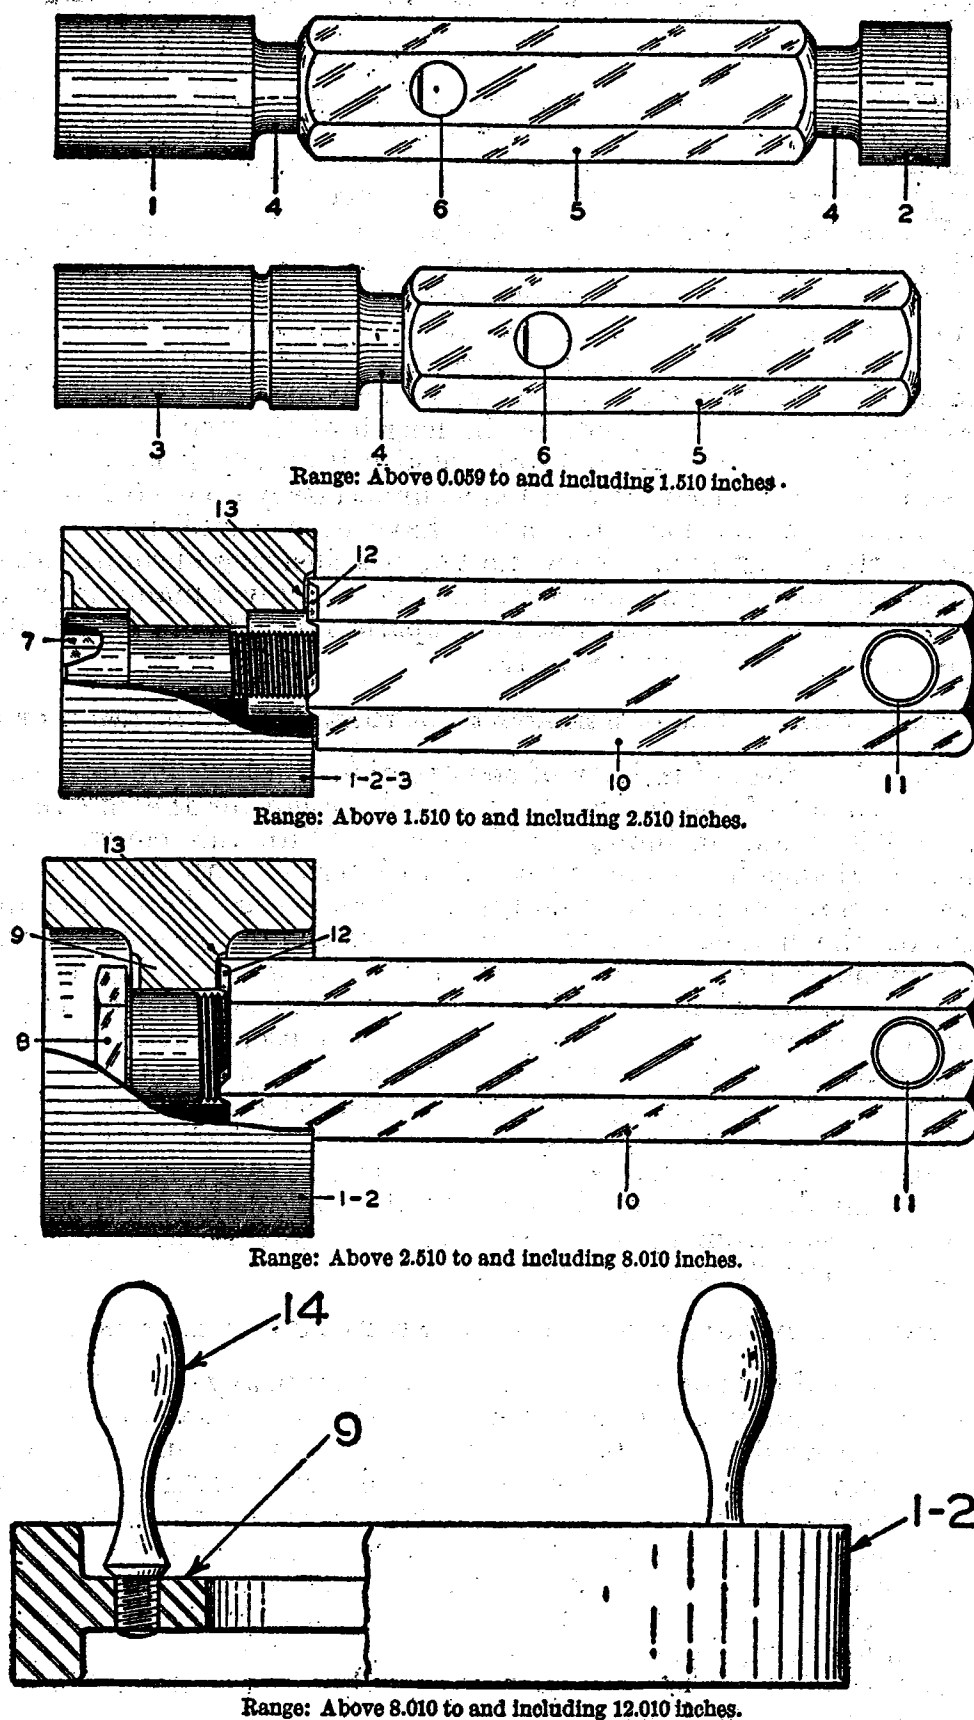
American Gage Design Standard plain cylindrical plug gages.
